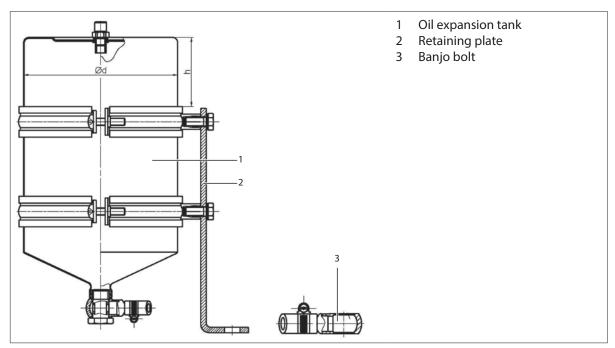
Accessory set, Part 1: Oil expansion tank unit with retaining plate
